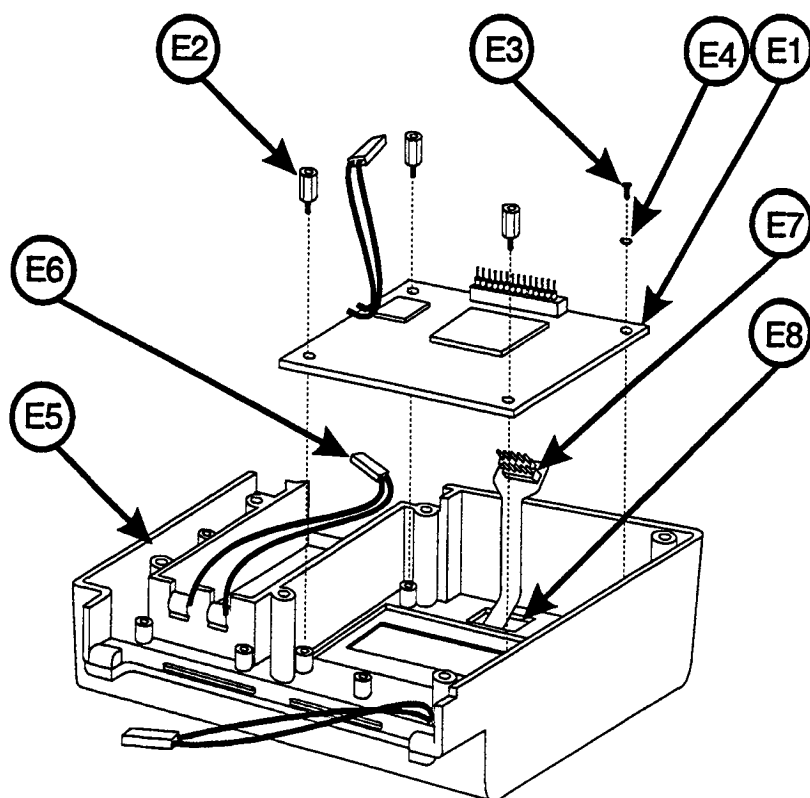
Figure E LCD Circuit Board Assembly and Front Case Half Parts
